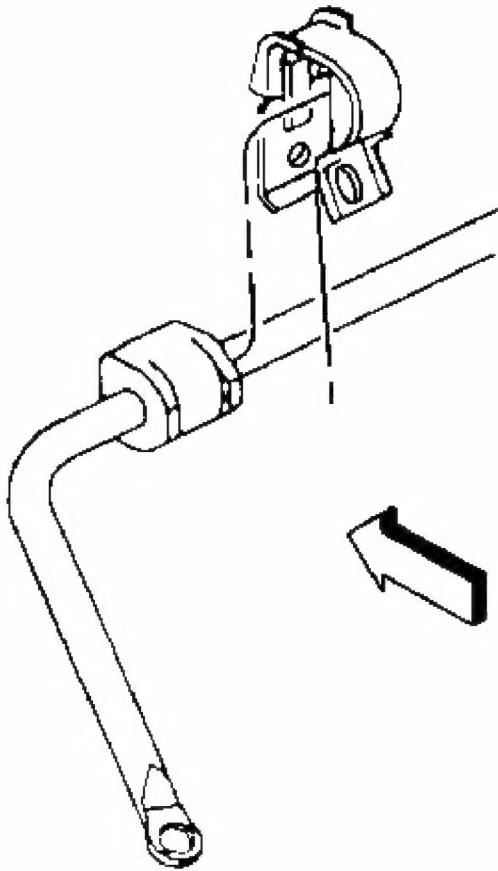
Removing/Installing Stabilizer Shaft Insulator
